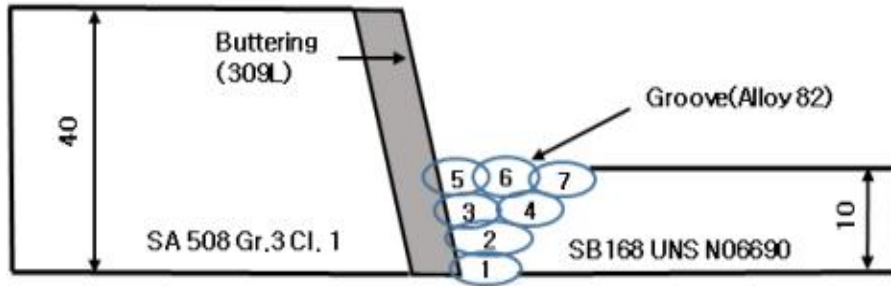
309L buttering and Alloy 82 groove welding schematic diagram.
